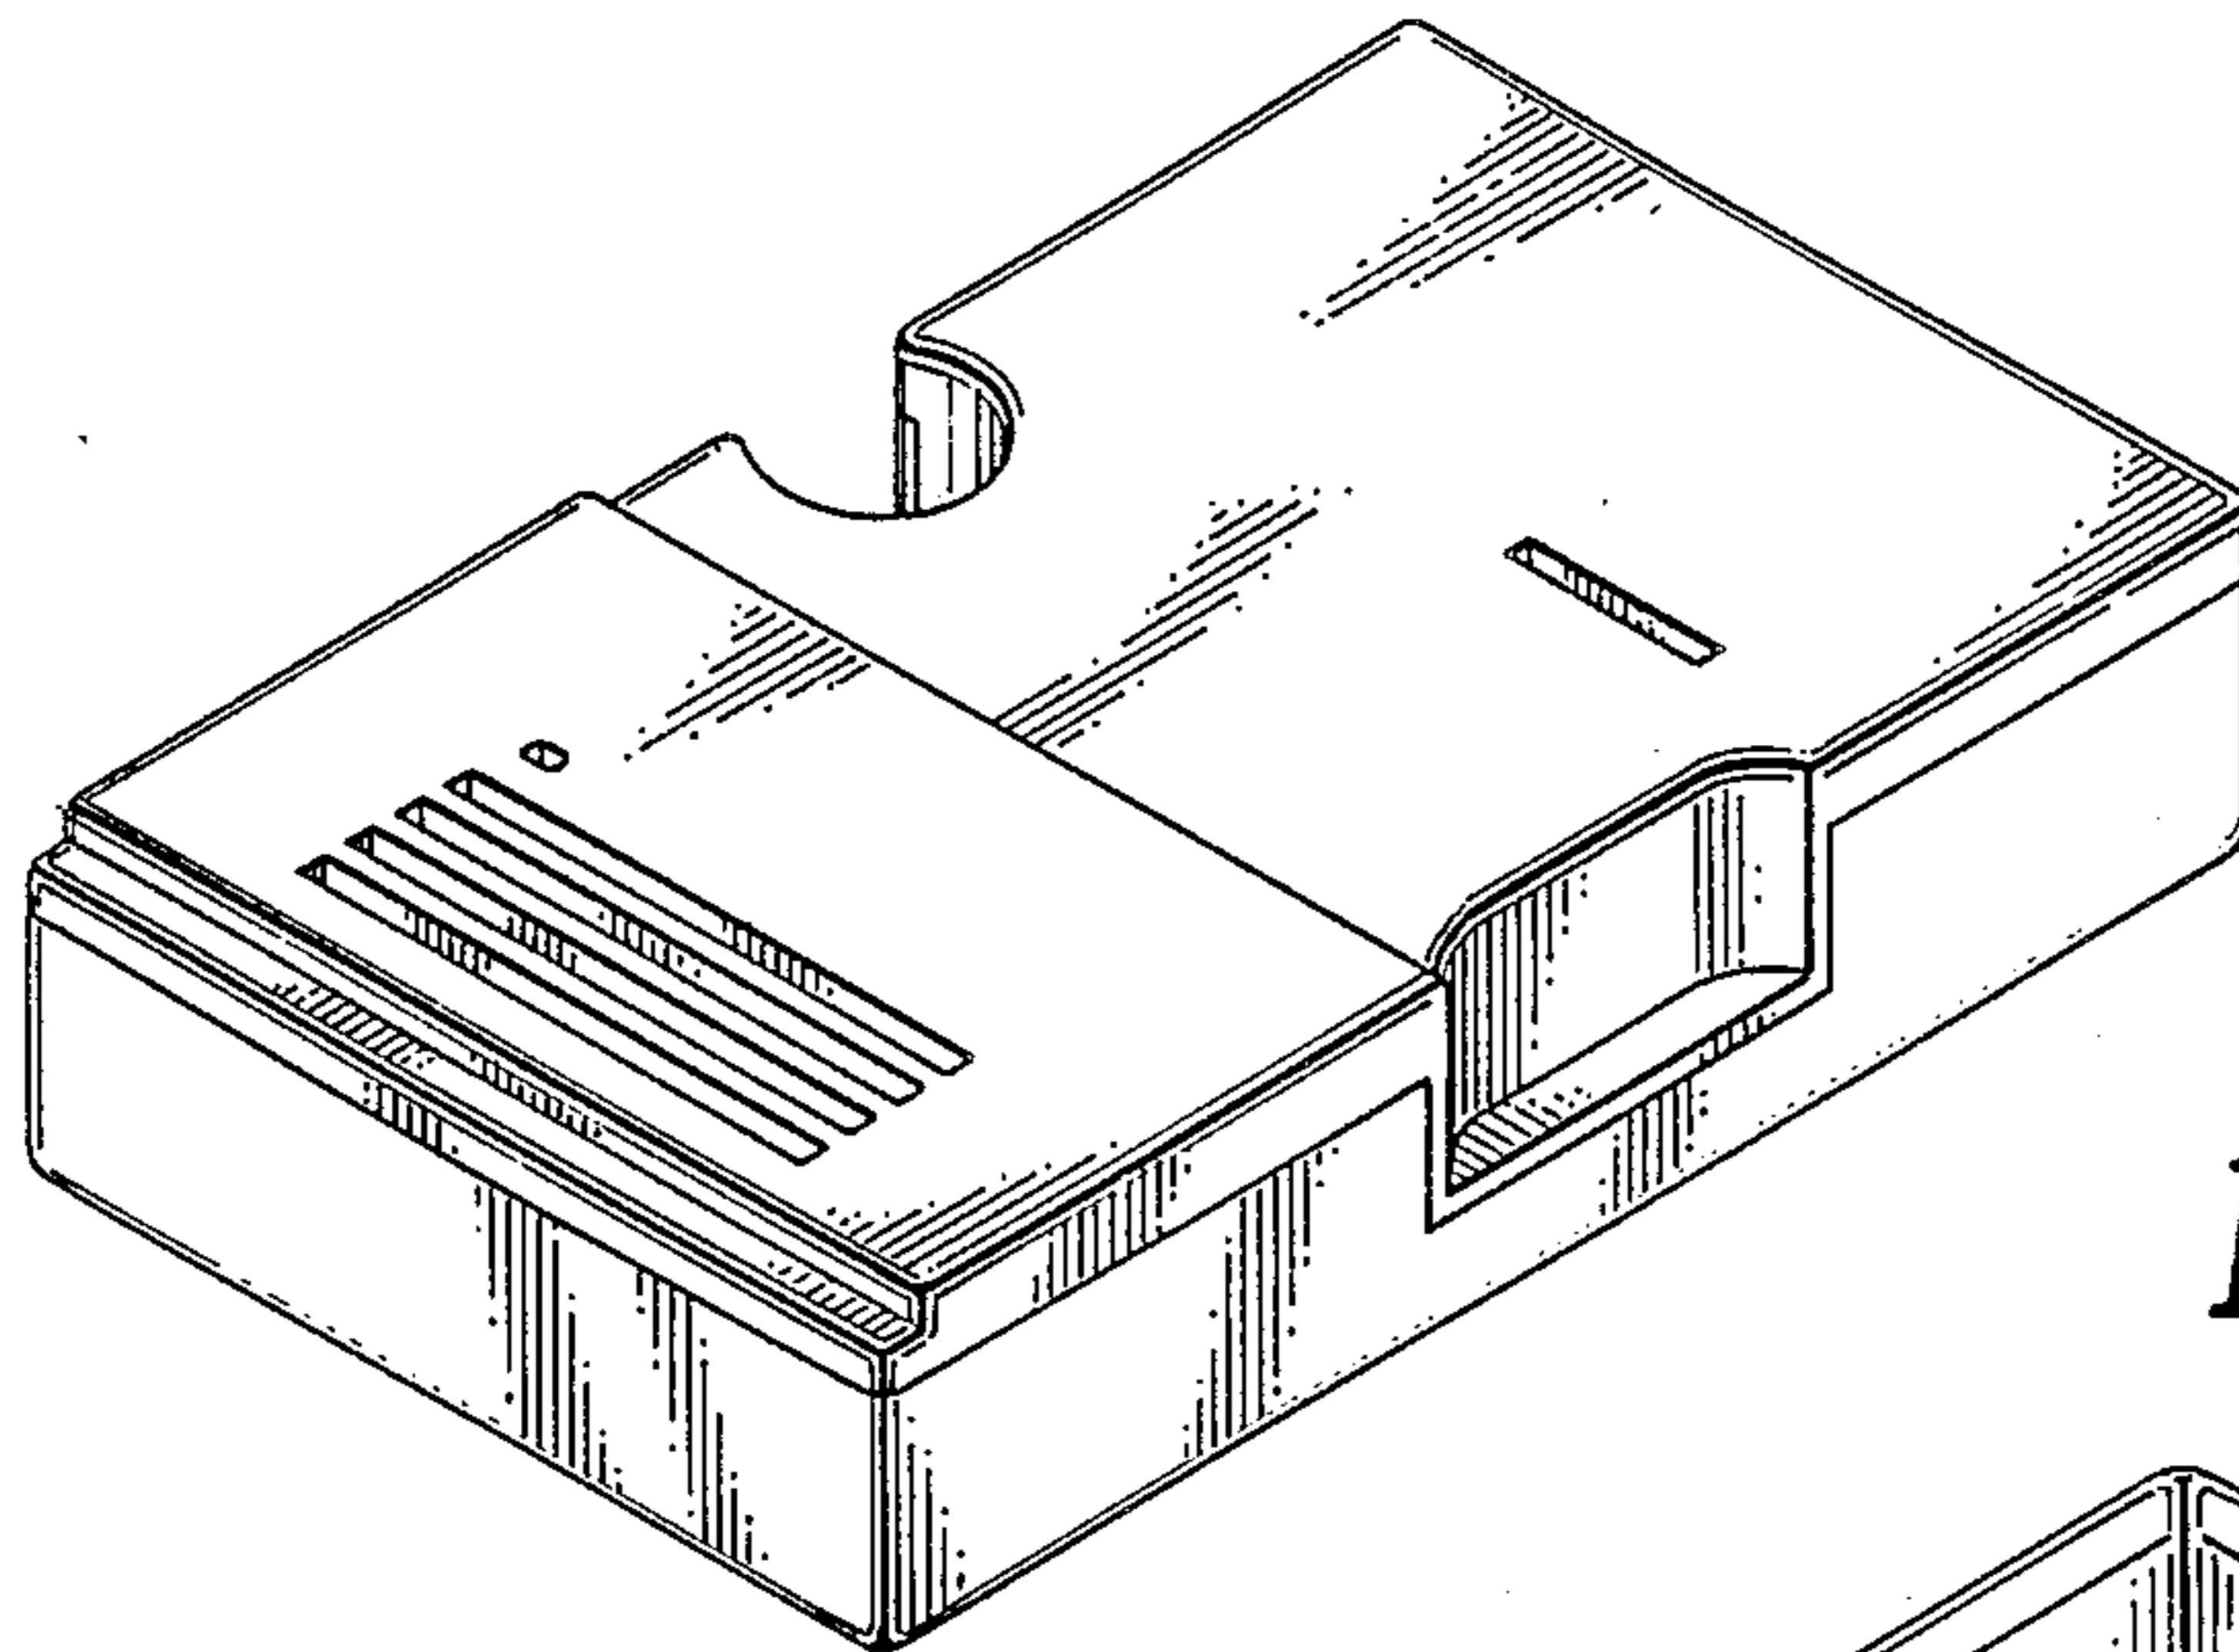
is a front, top and left side perspective view of a thermal printer tape ribbon cartridge showing our new design;
